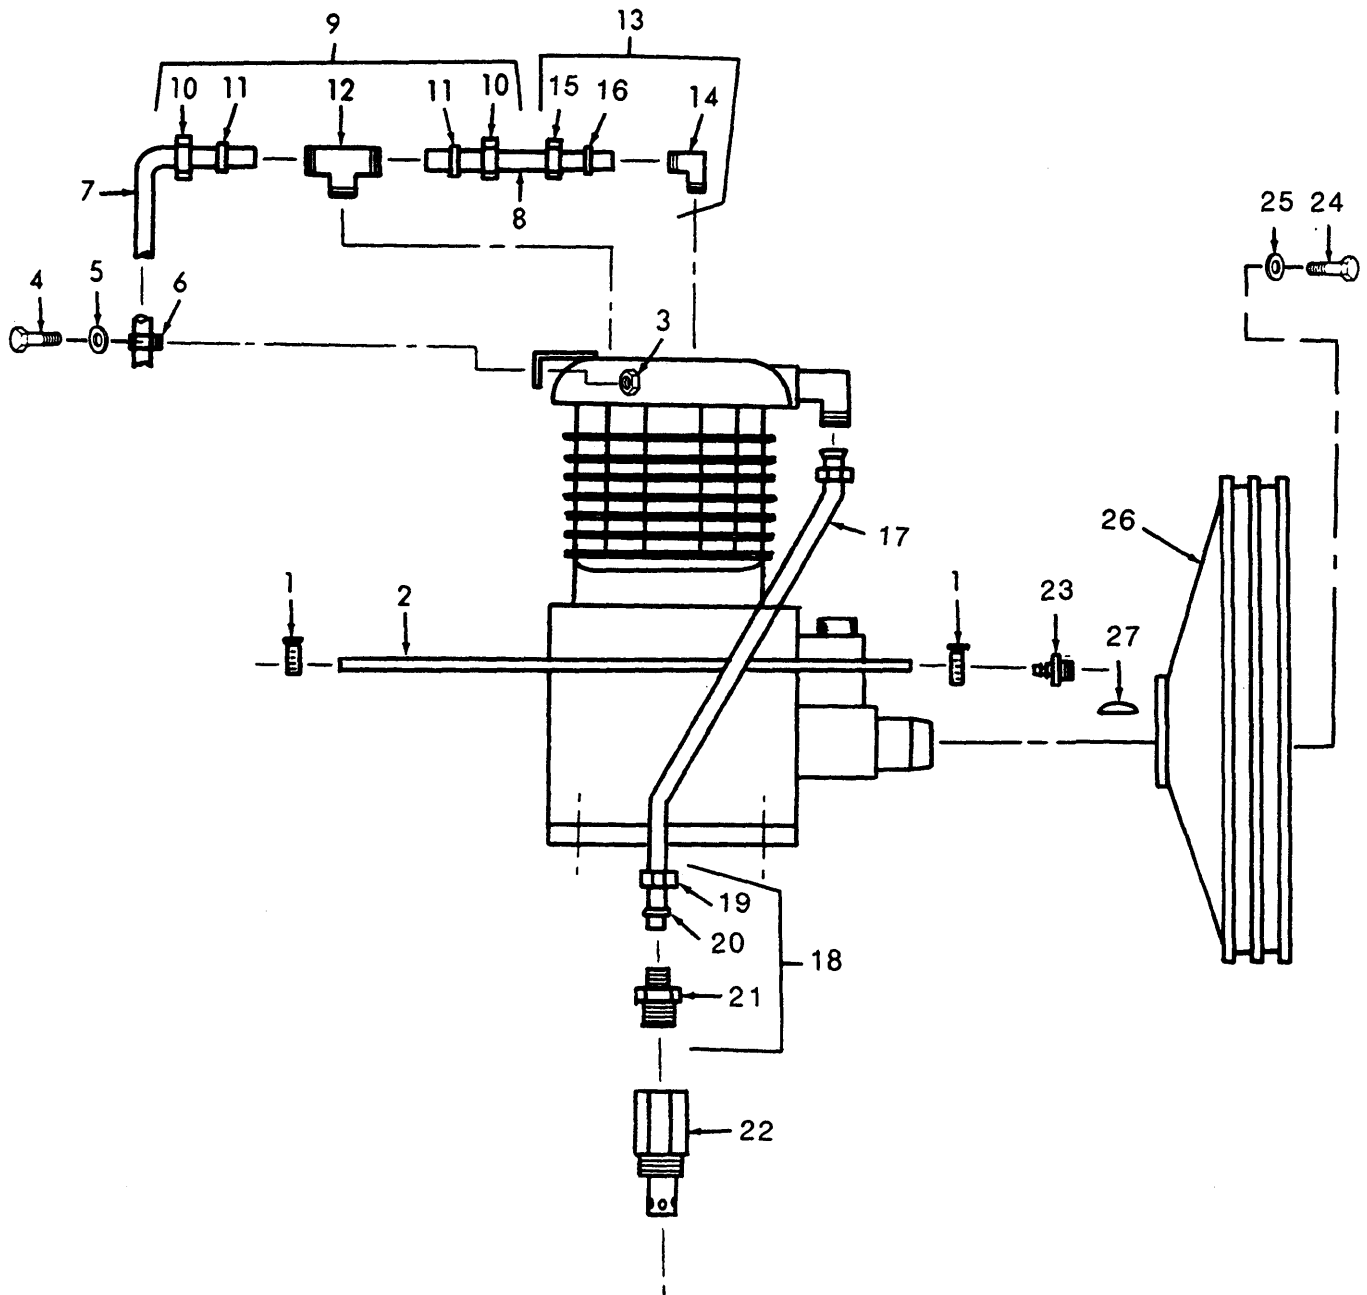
Tube Assemblies, Engine Speed Control, Fan and Pulley.
